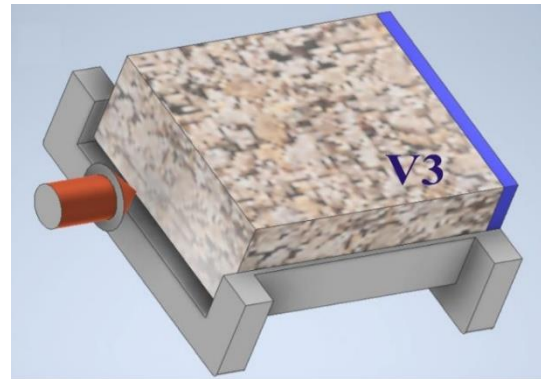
Example of arrangement of 3DP PLA (marked in blue) moulding/core box wall inside a waveguide filled with moulding sand in 3<sup>rd</sup> variant (V3)
